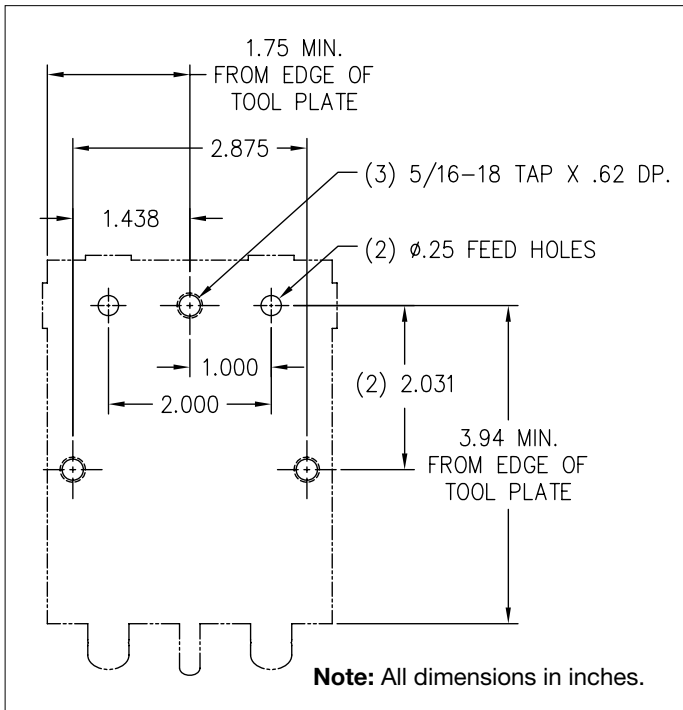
, Mounting Hole Pattern, MCRC21 Receiver with Pilot Operated Check Valve
